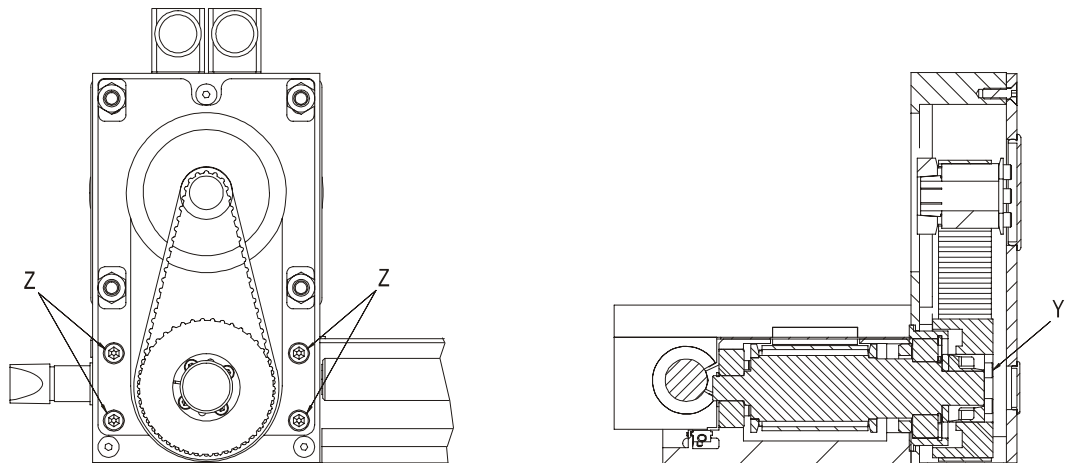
Open Drive Assembly of Module 142 and Cutaway View
